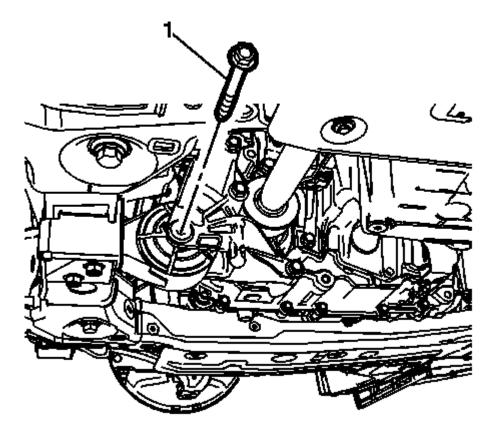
Identifying Front Transmission Mount Through Bolt Courtesy of GENERAL MOTORS COMPANY
